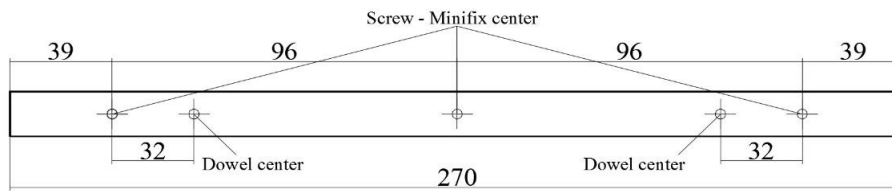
Typical placement of screw, dowel, and minifix centers in the corner joints
